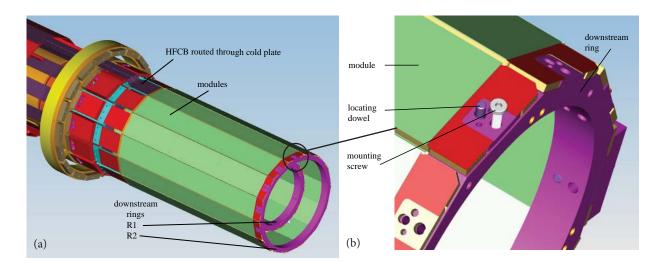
(a) Assembled R1 and R2 (b) close-up of downstream ring.
